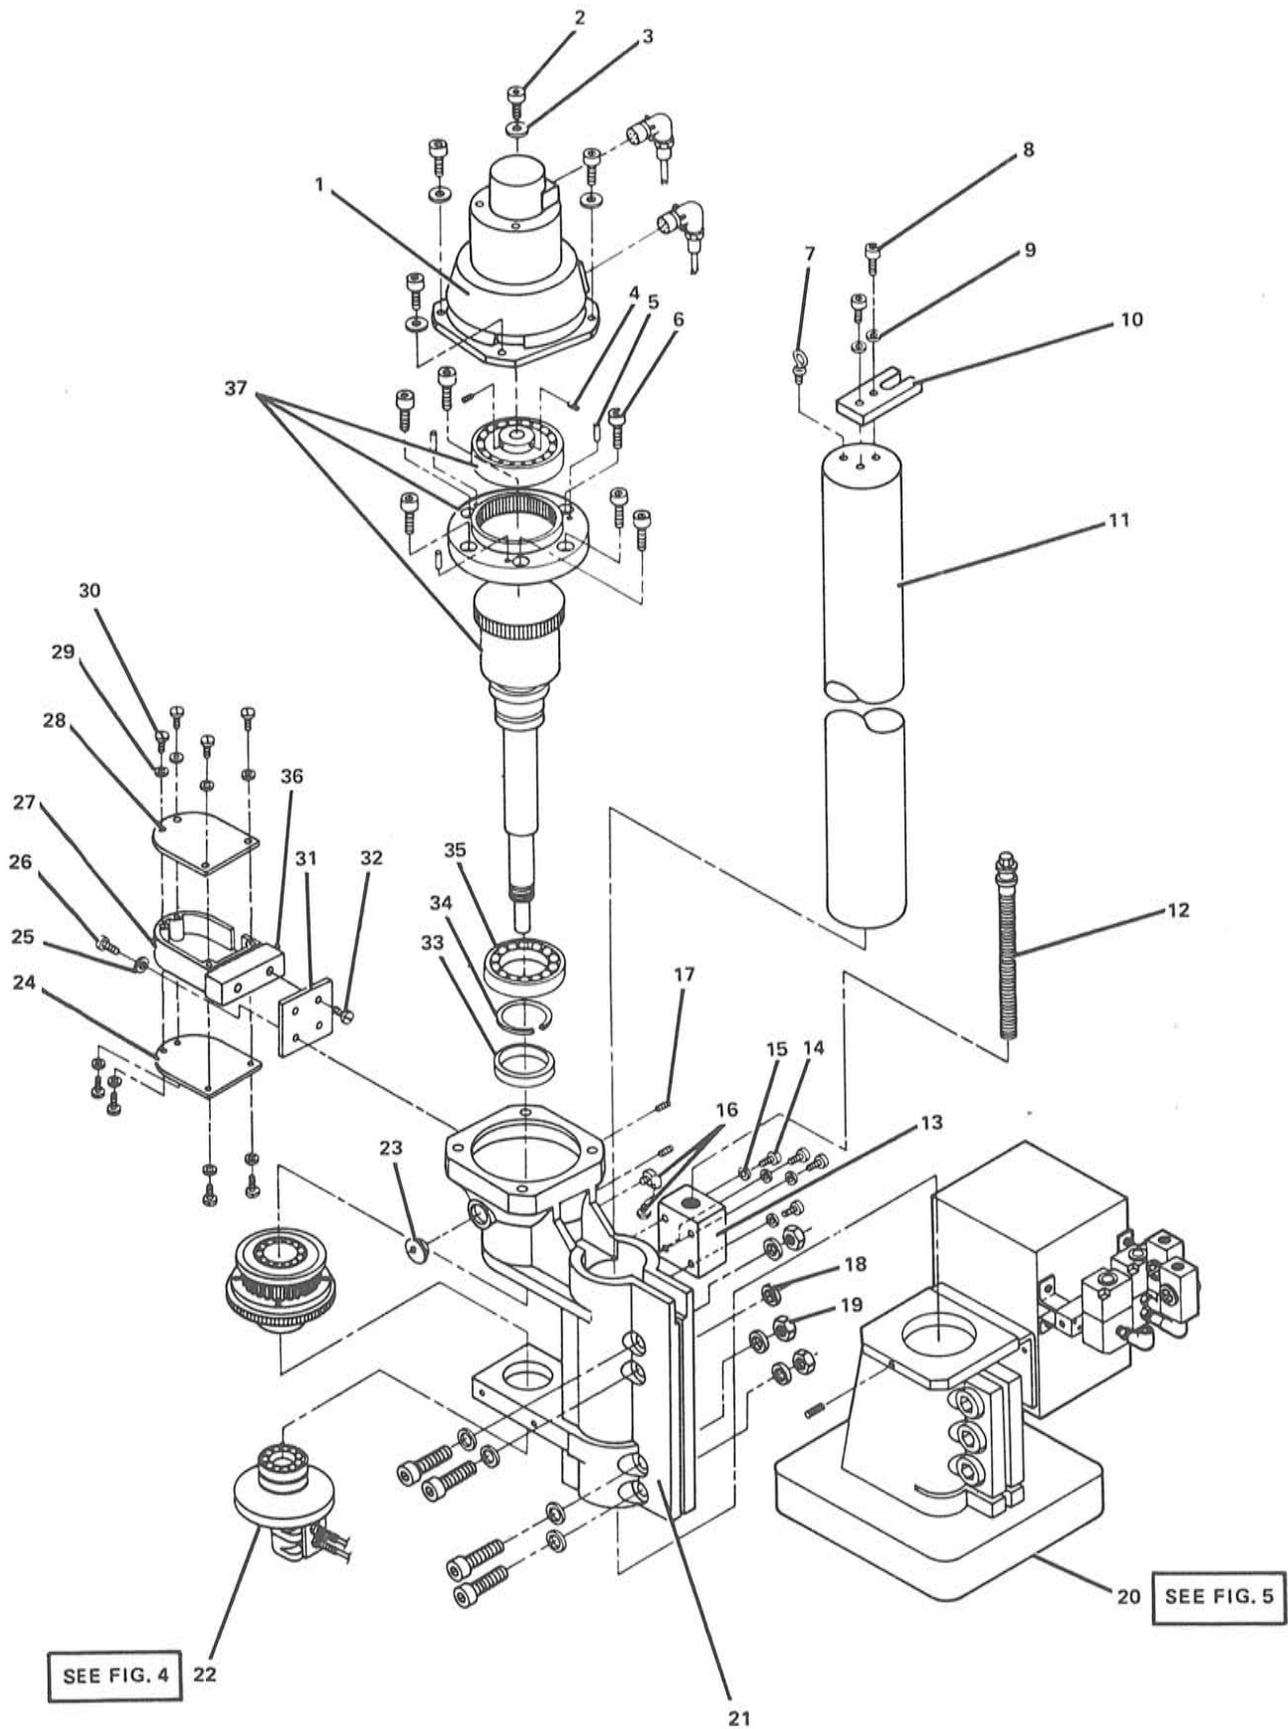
THETA ONE ASSEMBLY. SEE LIST 3.
